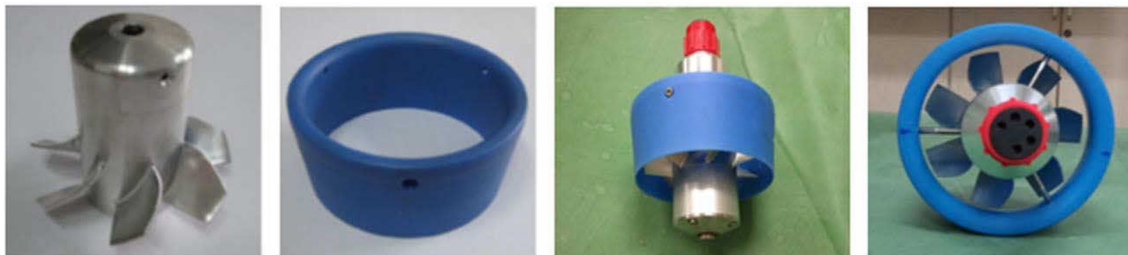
The manufactured propeller, nozzle and assembled thruster.
